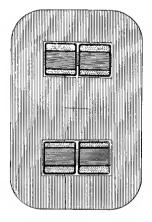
Cross-section of coils and core of transformer shown in Fig. 95. (Section in plane of stampings.)
